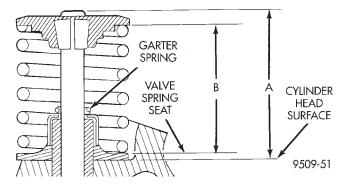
Checking Spring Installed Height and Valve Tip Height Dimensions
